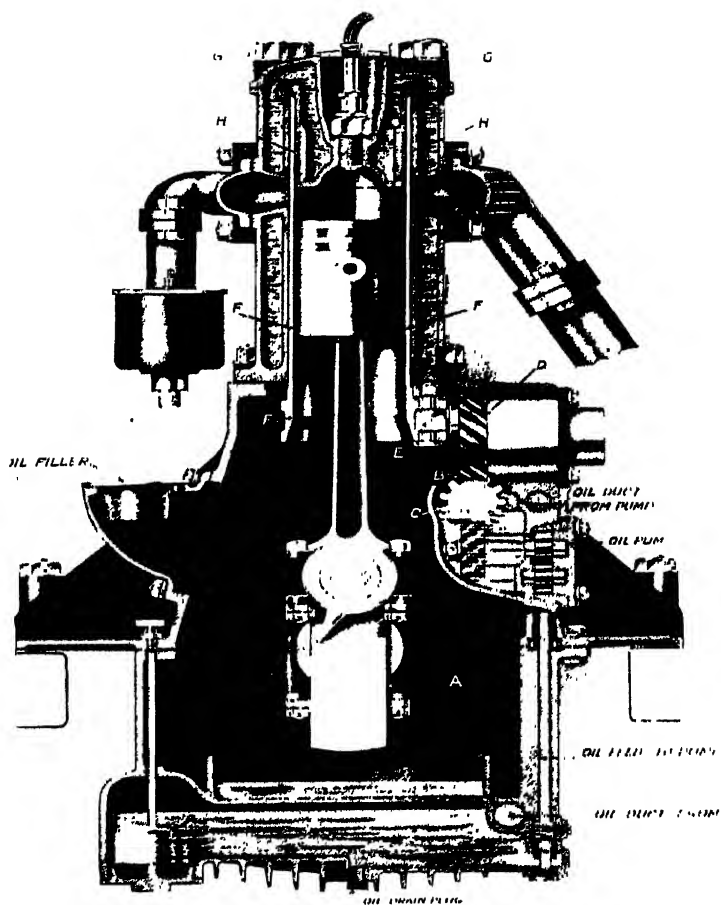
THE ARGYLE SINGLE SLEEVE ENGINE
